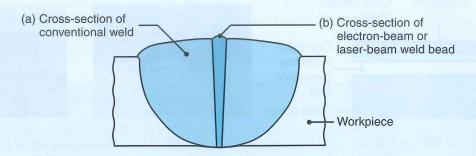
The relative sizes of the weld beads obtained by tungsten-arc and by electron-beam or laser-beam welding.
